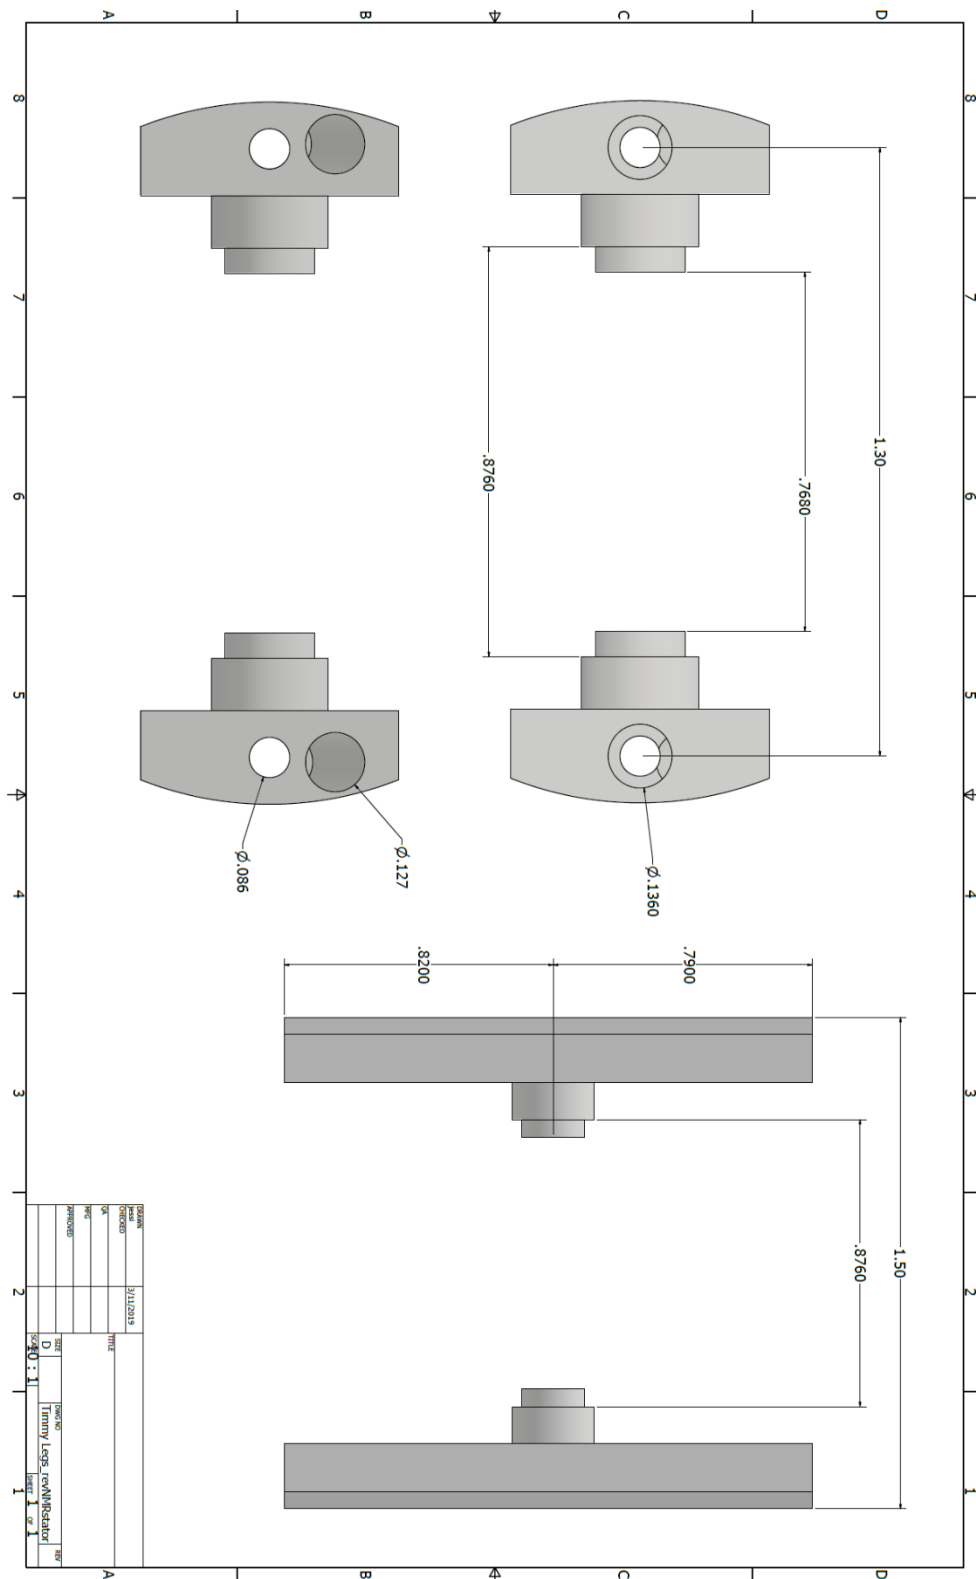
Supports to enable use of a spinning assembly with different dimensions.
